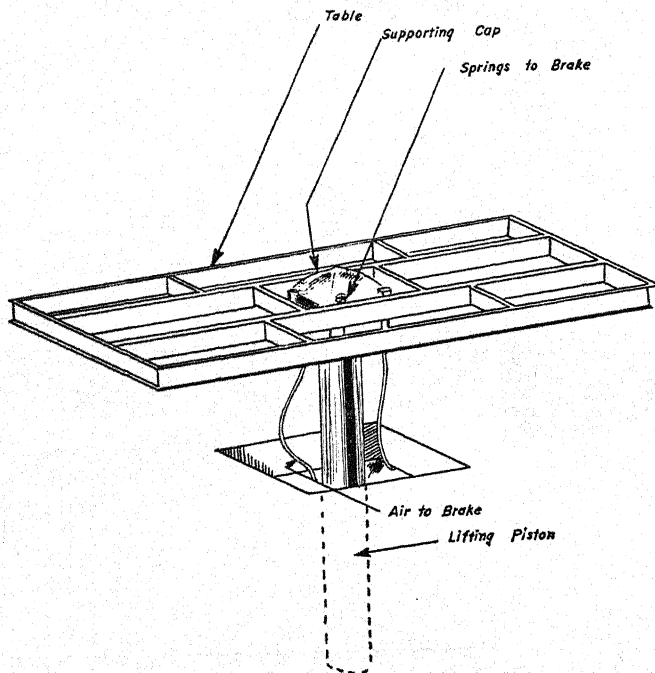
Arrangement of arc welded tilting fixture.
